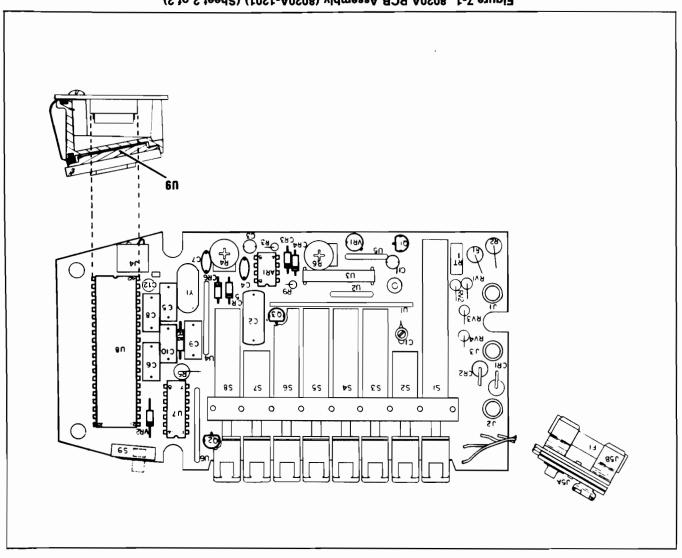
8020A PCB Assembly (8020A-1201) (Sheet 2 of 2)
